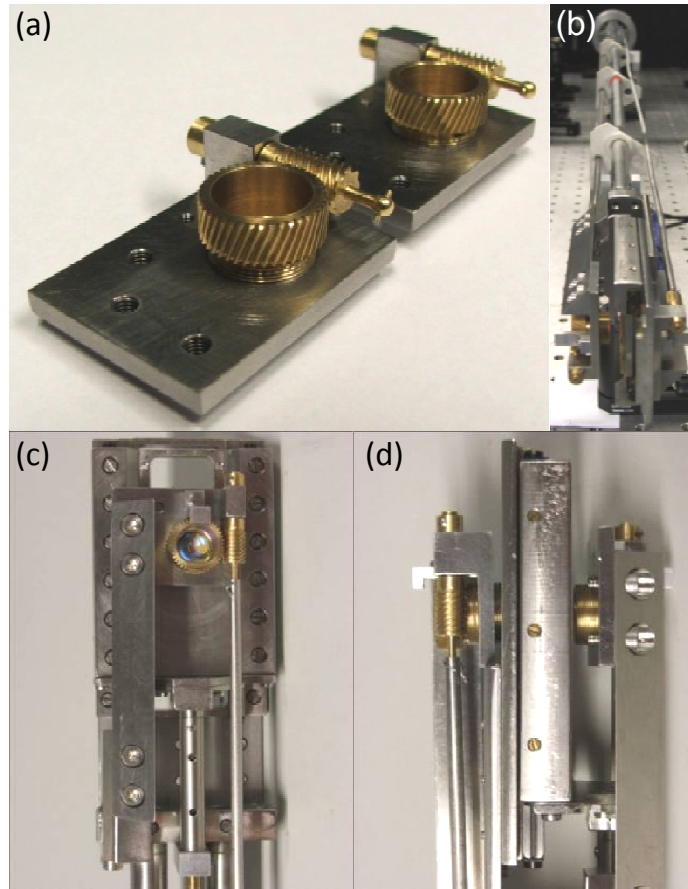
Dual lens holder, in a) worm wheel assembly, in b) sample holder inset, in c) and d) dual lens holder mounted on the sample holder frame, the front and side view respectively.
